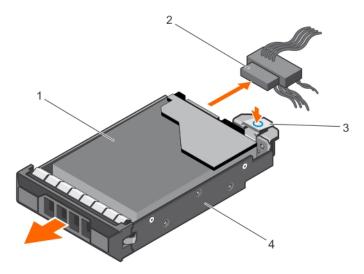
Removing a 3.5-inch cabled hard drive carrier
